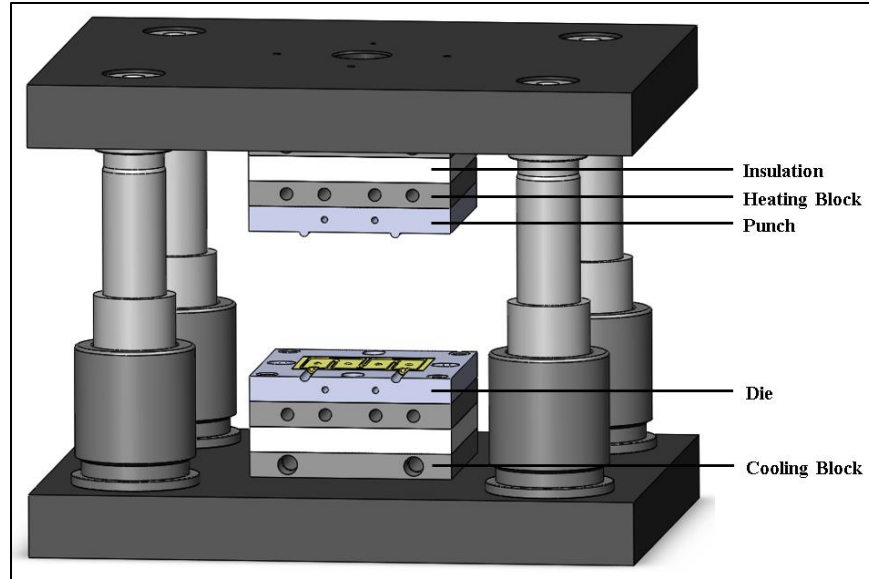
CAD of the custom tooling assembly. SHC shown in yellow.
